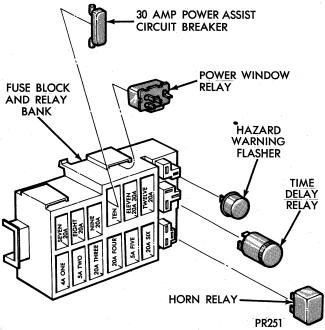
Fuse Block and Relay Bank R,W,S, and X Models
